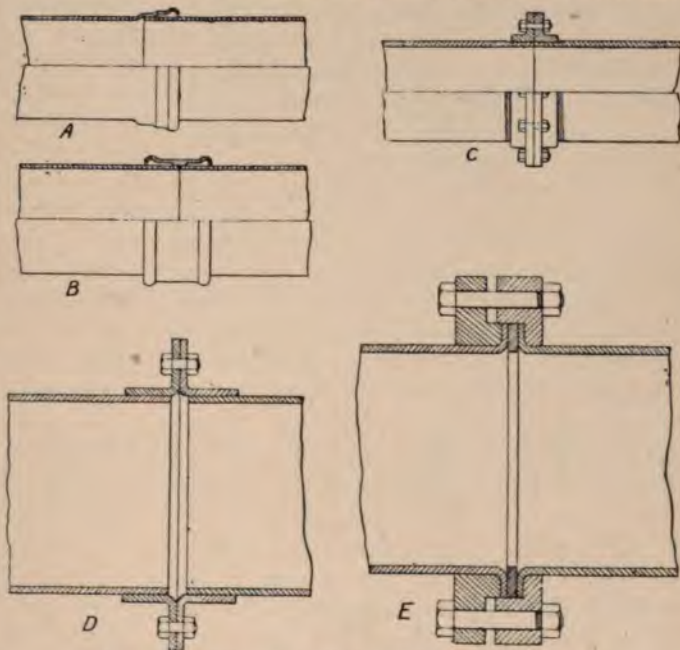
Steel Pipe Joints, Socketed and Flanged.
